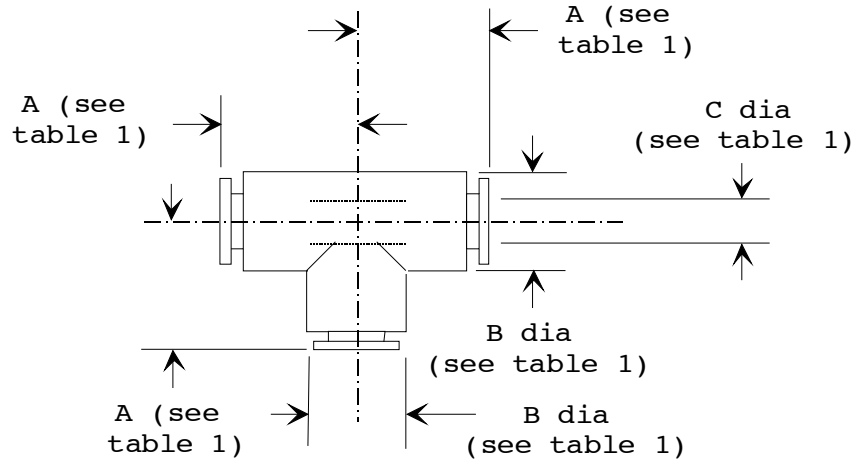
BOF tube tee/tee tube coupler (configuration T).
